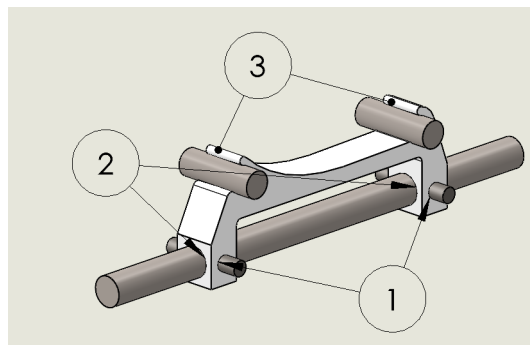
Solidworks model of 3D printed wing attachment part for stress analysis. 1- set screw holes, 2- fuselage rod holes, 3- airfoil rod clips.
